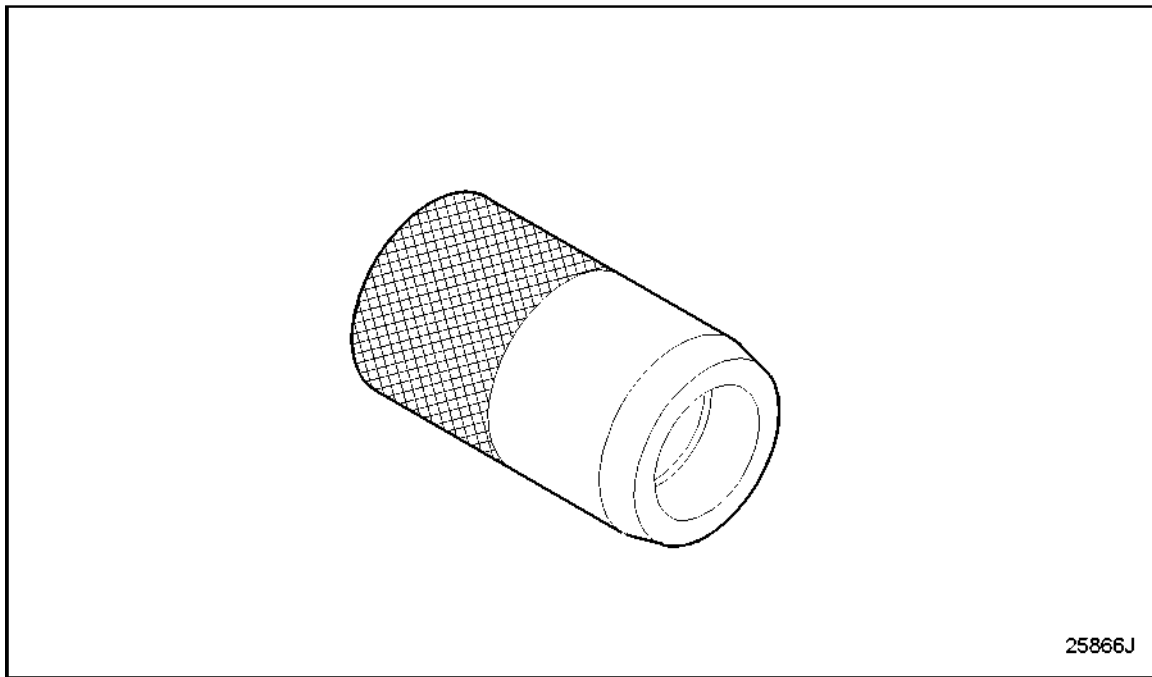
Accessory Drive Seal Alignment Tool,J 21166
